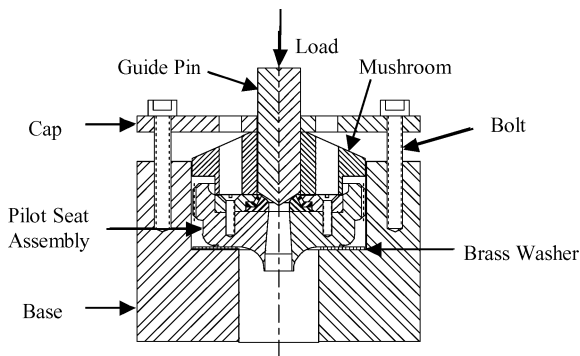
Prototype RPOV hot-forming fixture; retainer screws used instead of EB weld.
